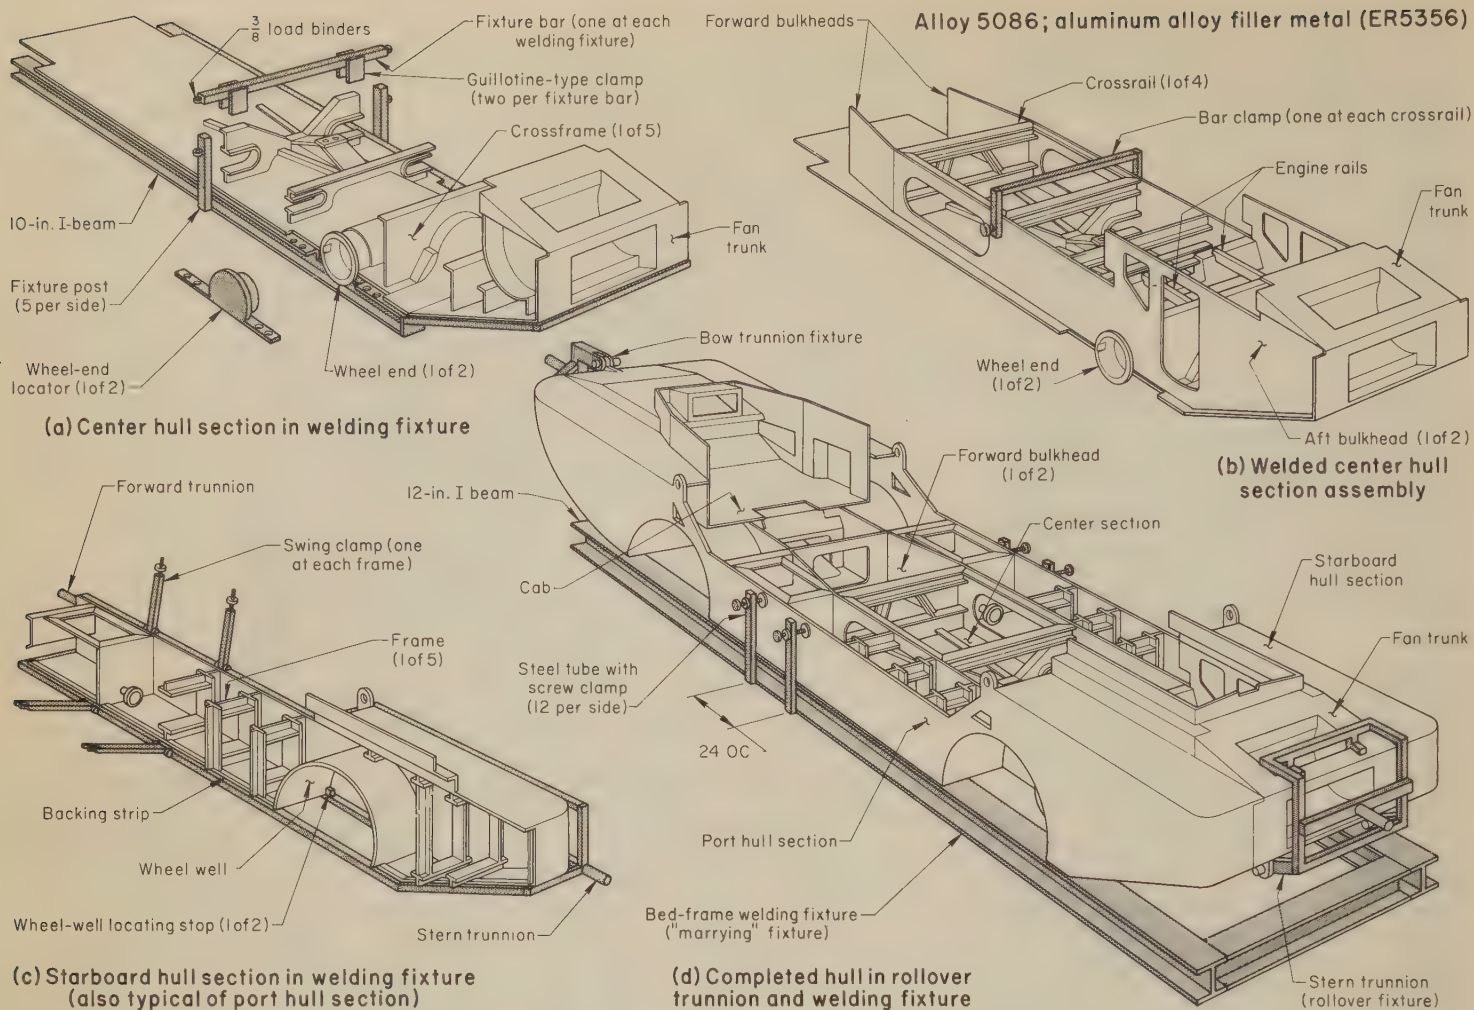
Fixtures used for welding center hull section of an amphibious lighter to port and starboard hull sections (see also Example 297)
